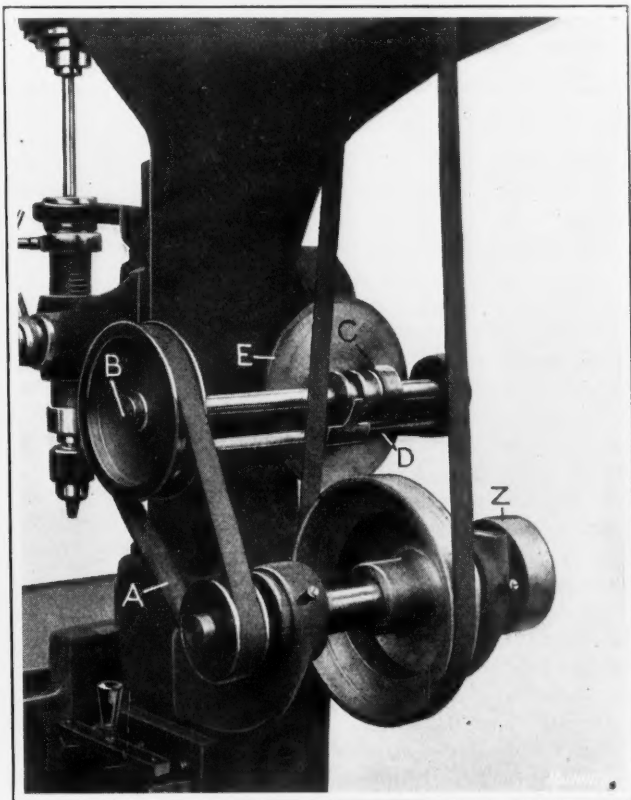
Friction Drive employed to operate Automatic Feeding Device
